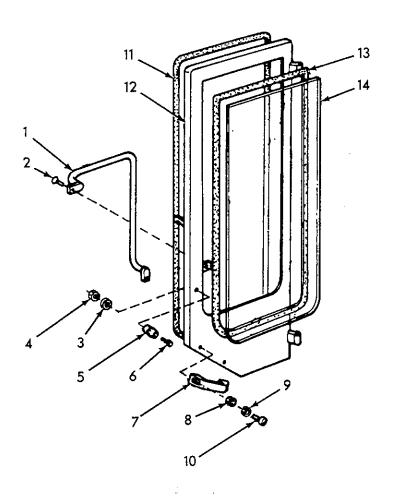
LEFT SIDE DOOR LATCH LINKAGE
